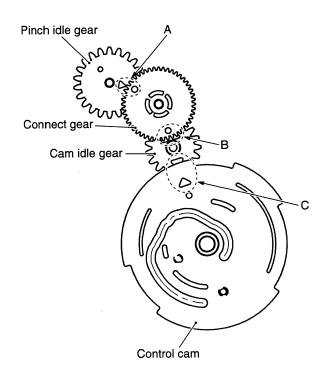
Gear Positioning 1 (Bottom Panel Side)
